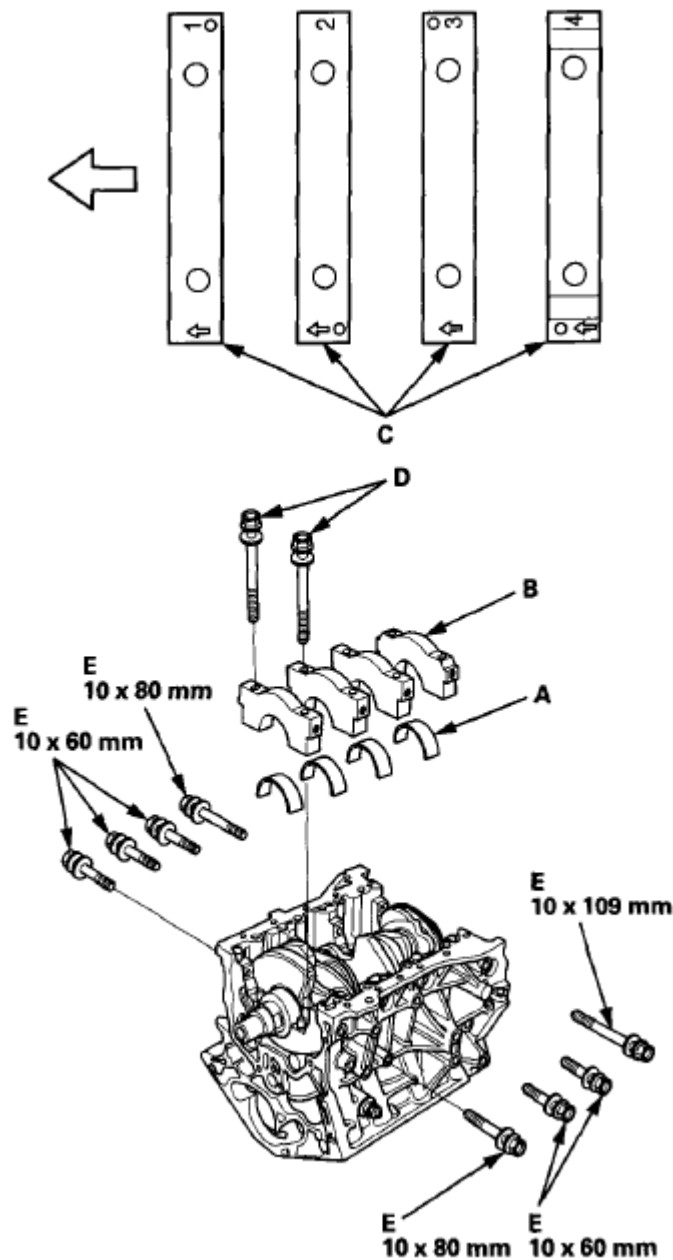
Identifying Bearings And Main Bearing Caps Installation Position
